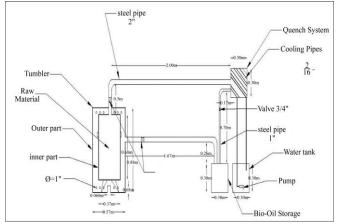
Dimensions and engineering drawing of bio-oil production unit
